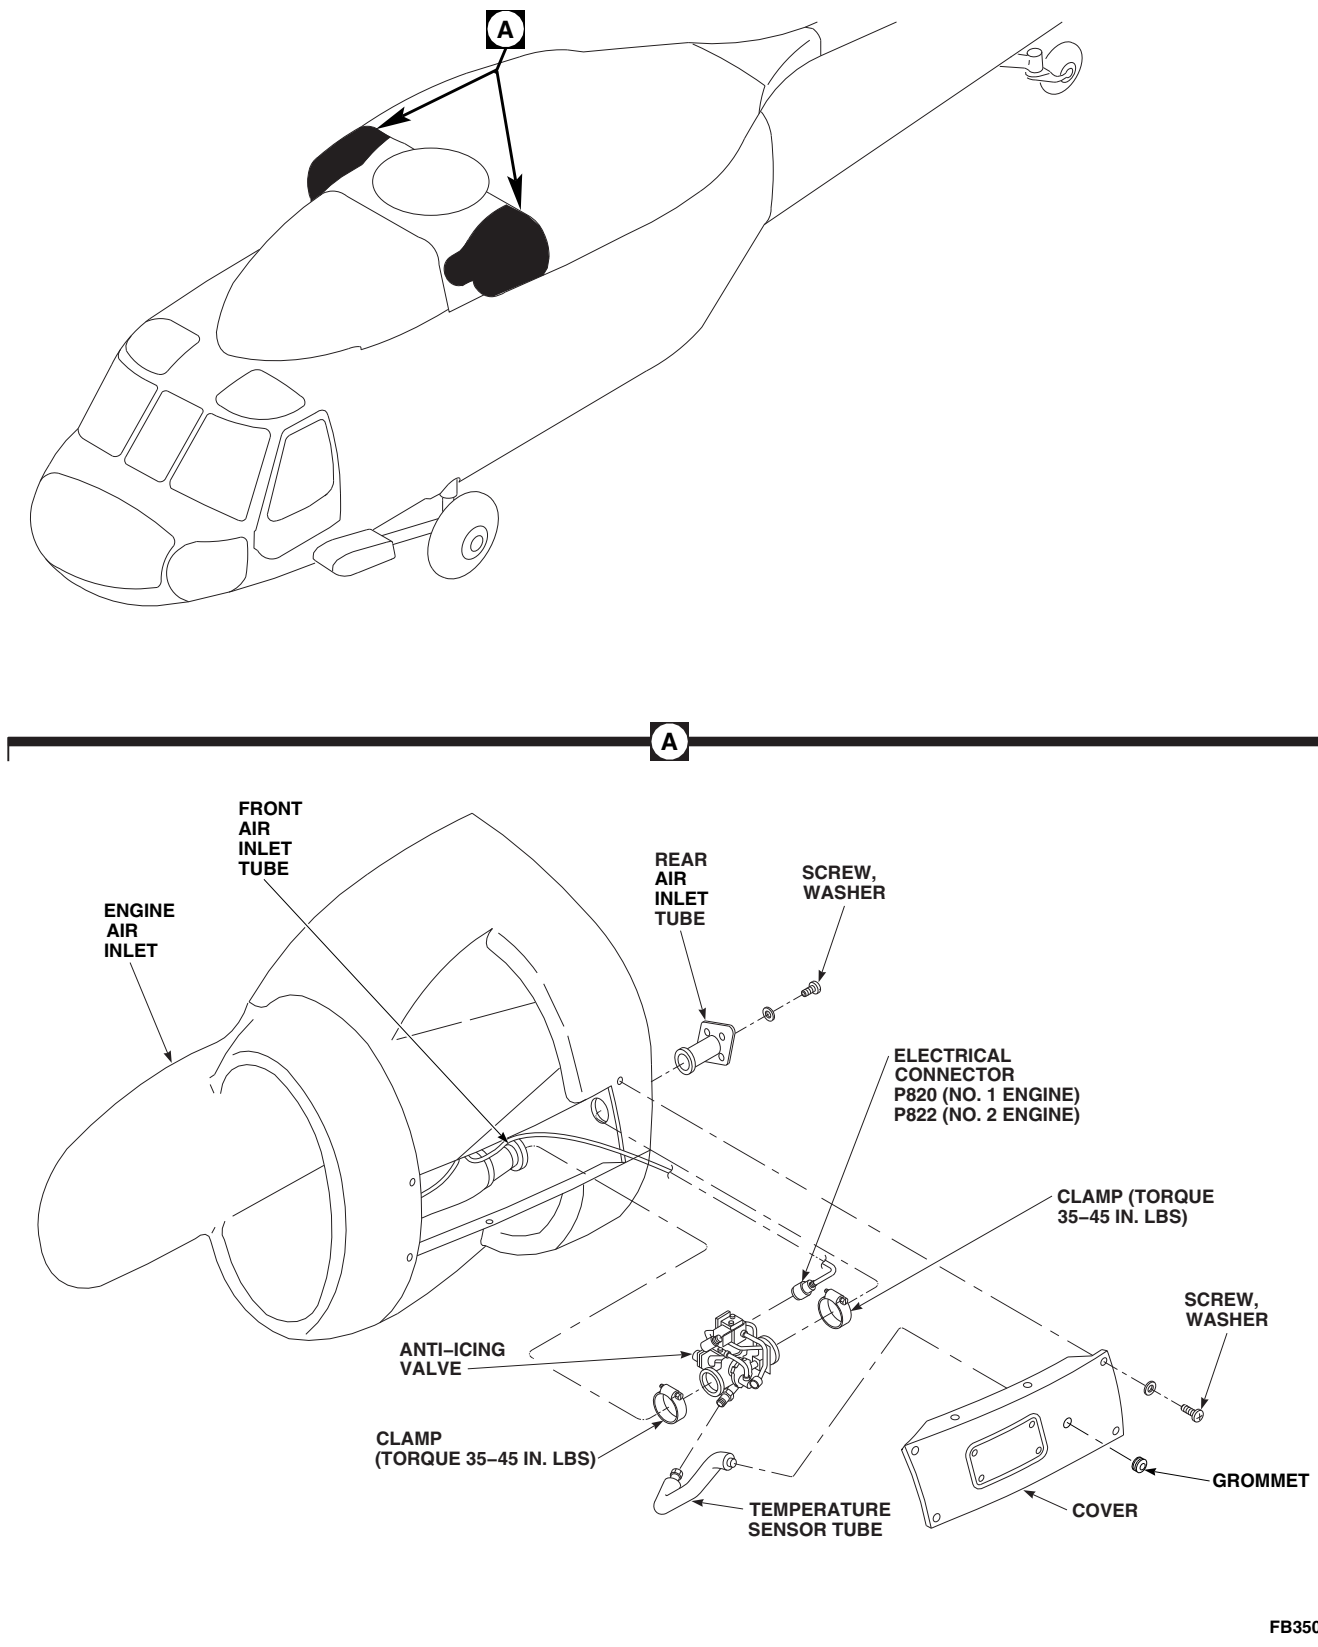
REPLACE ENGINE AIR INLET ANTI-ICING VALVE
